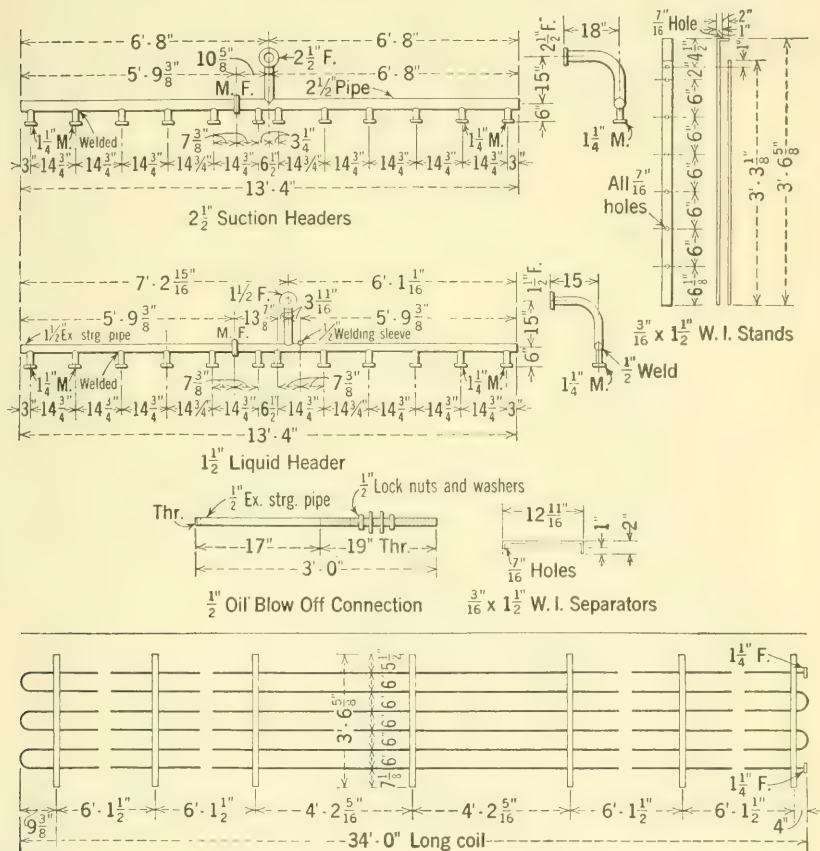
Piping and Headers for Can Ice Manufacture.
